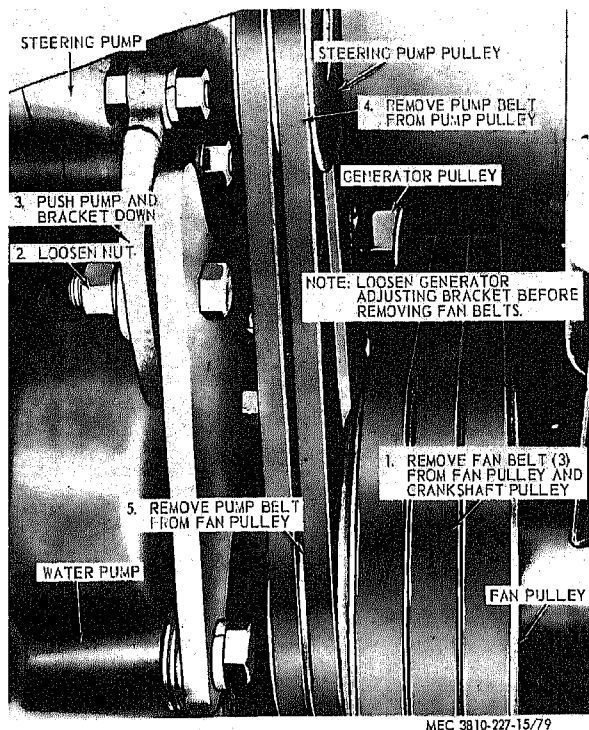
Fan belts and hydraulic steering pump belt, removal and installation.
